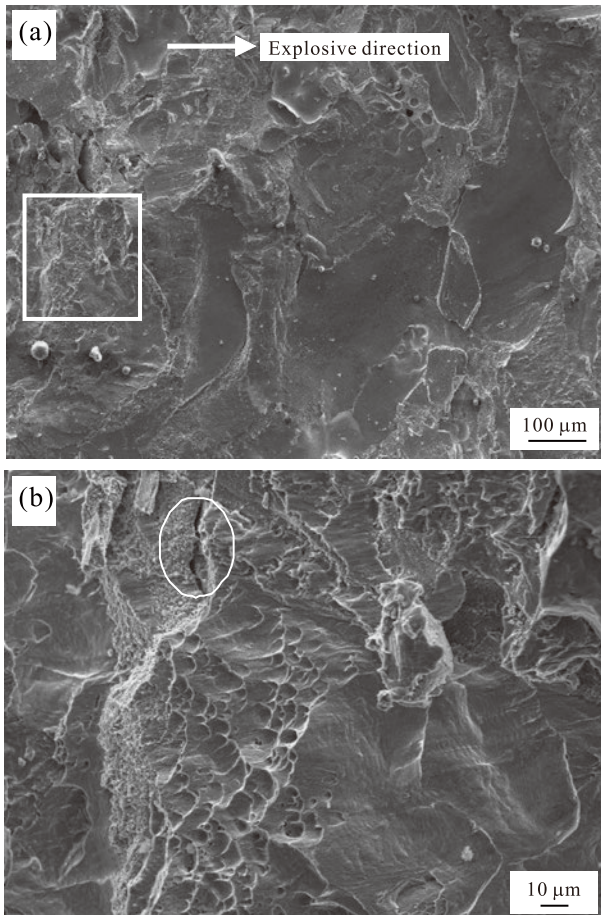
Fracture on the Cu side of explosive welded interface (a) and selected zone magnification (b). The shear force is loaded along the explosive direction
